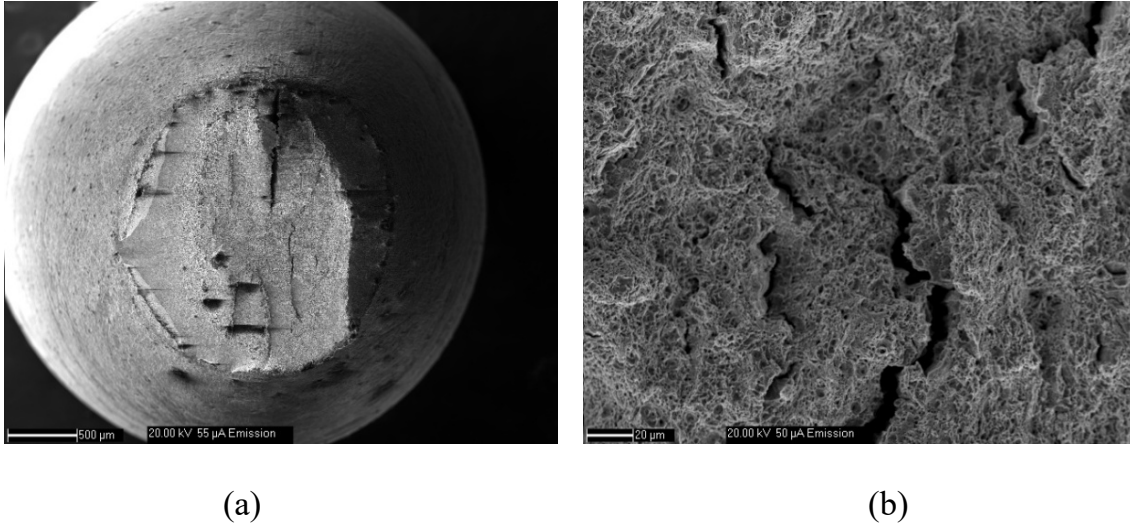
Fracture surface images of tensile tested boron added P91 steel at 300 K.
